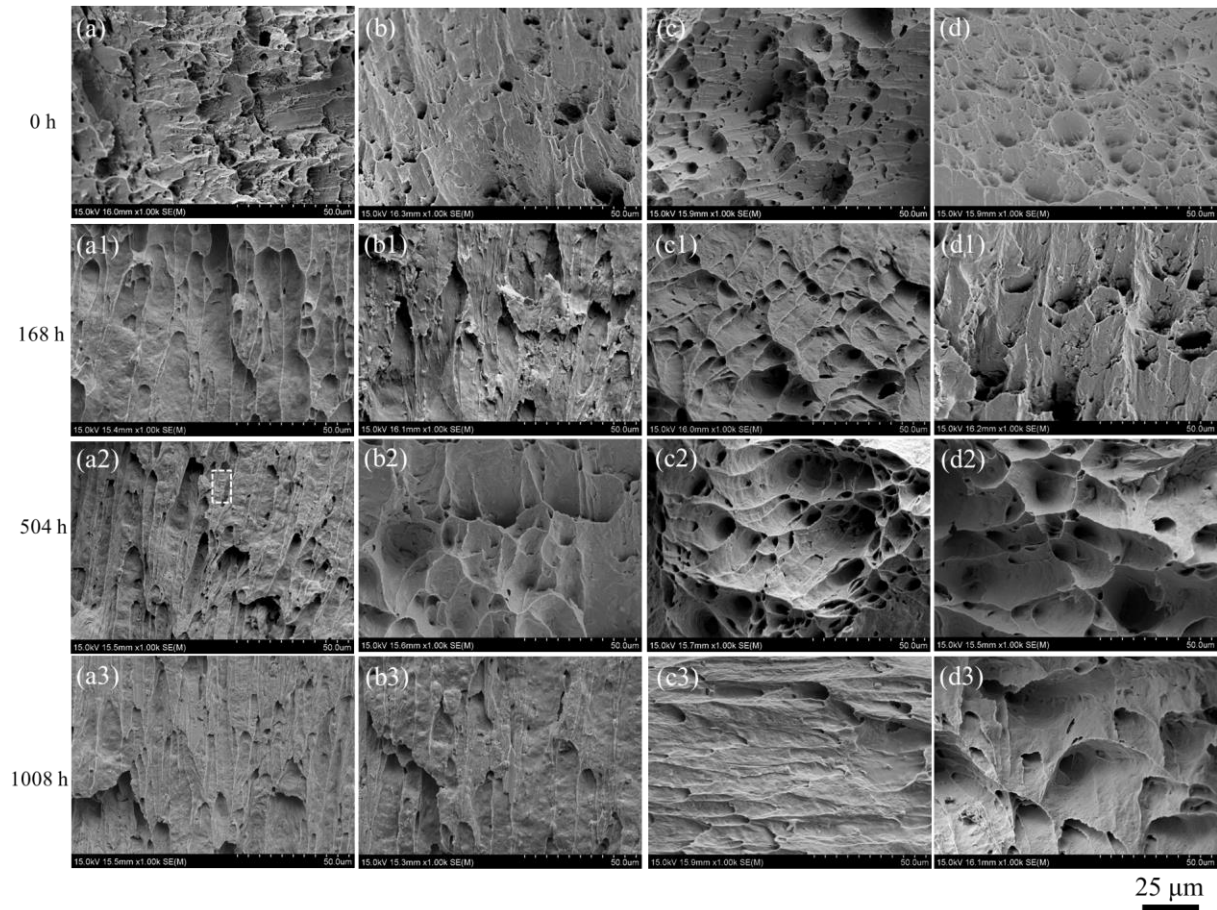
Fracture surface of four kinds of solders with different thermal aging times. (a) plain Sn1.0Ag0.5Cu, (b) Sn3.0Ag0.5Cu, (c) 0.3 mass% NiO/ZrO₂ reinforced Sn1.0Ag0.5Cu composite solder, and (d) hybrid reinforced Sn1.0Ag0.5Cu composite solder. 1, 2, and 3 represent the thermal aging time of 168 h, 504 h, and 1008 h, respectively.
